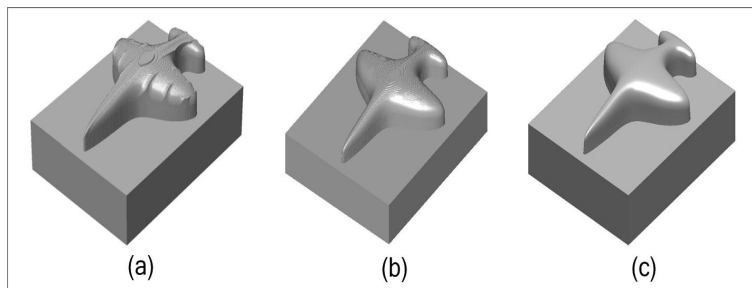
Tool-paths of (a) rough machining, (b) semi-finish machining and (c) finish machining
